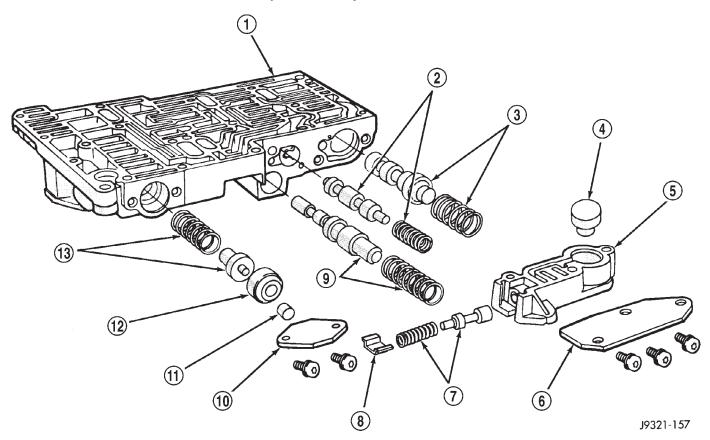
Upper Housing Shift Valve And Pressure Plug Locations
